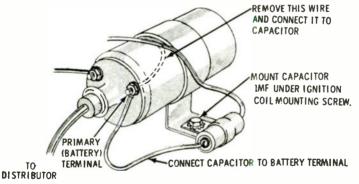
Method of mounting the capacitor on the ignition coil. (Motorola Consumer Products, Inc.)
